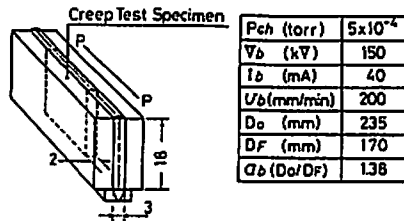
EB welding conditions for creep test specimen of EB welded metal
